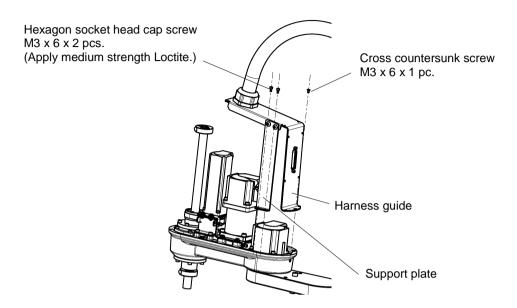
Mounting harness guide and support plate (KHL-300, KHL-400)
